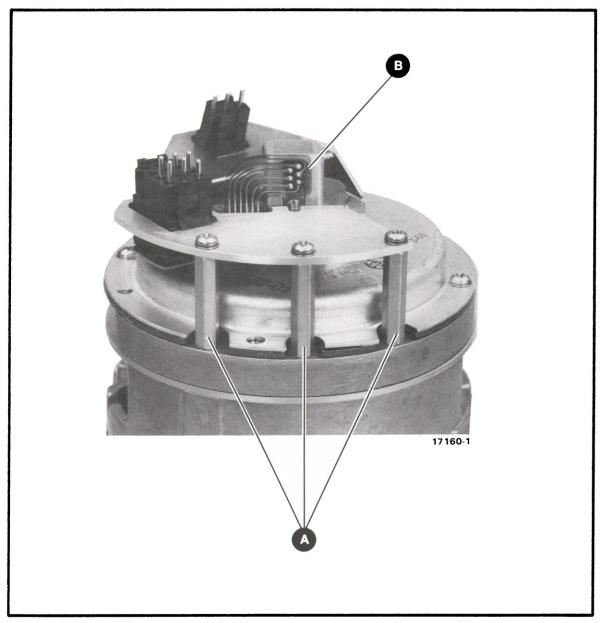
Scanner Assembly with Standoffs and Flexcircuit Installed
